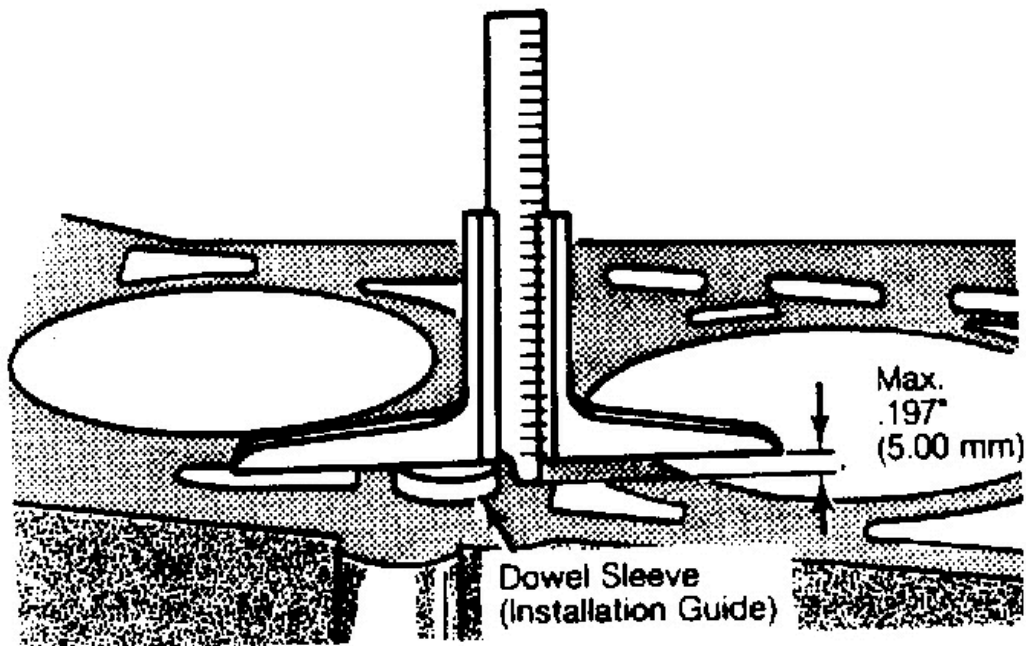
Measuring Dowel Sleeve Projection Above Cylinder Block
